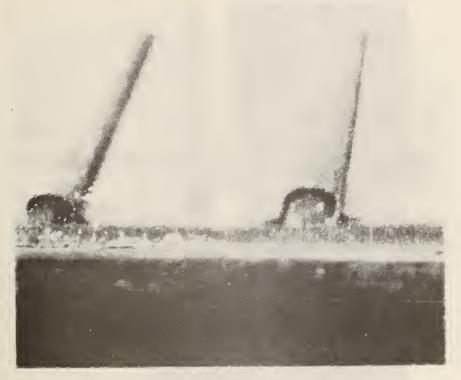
Failure of Joint Between Fluid Conduits and Absorber Plate
